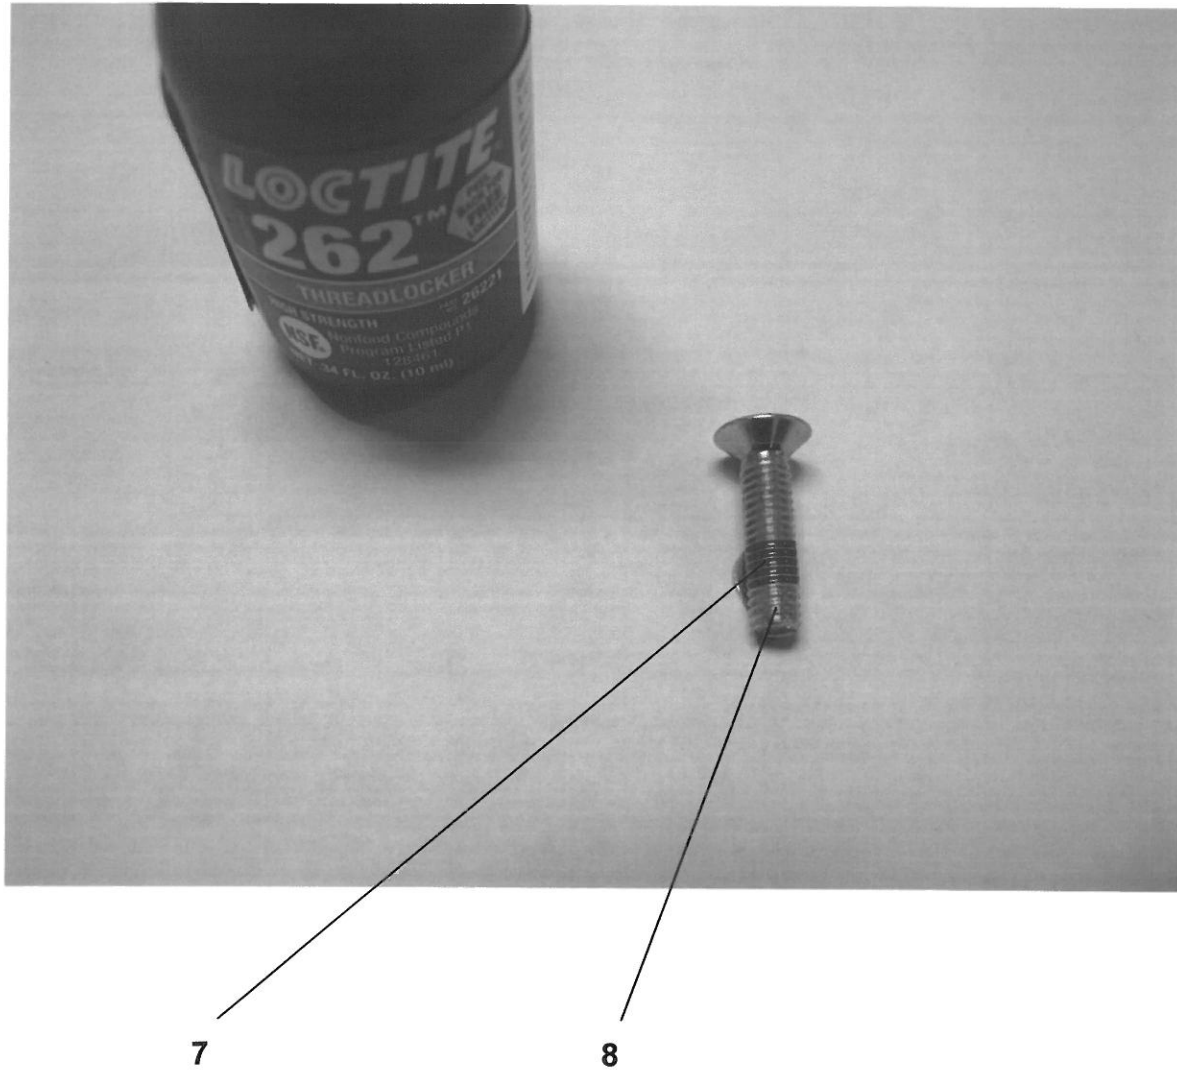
Flat head hex socket cap screw six with a Loctite #262 (item 7) on its surface. 7- Loctite #262, 8-alloy steel flat head hex socket cap screw (three pcs. required per assembly),
